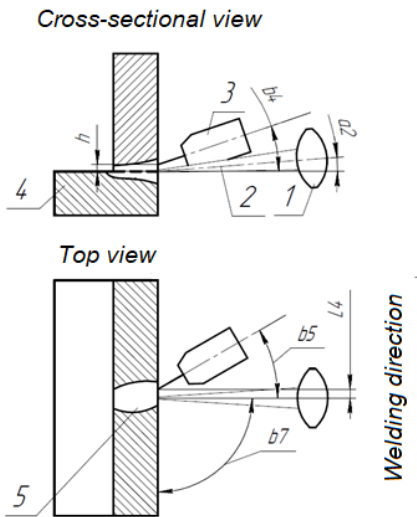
LAHW scheme, "hybrid" method of butt welds in horizontal position (PA):
